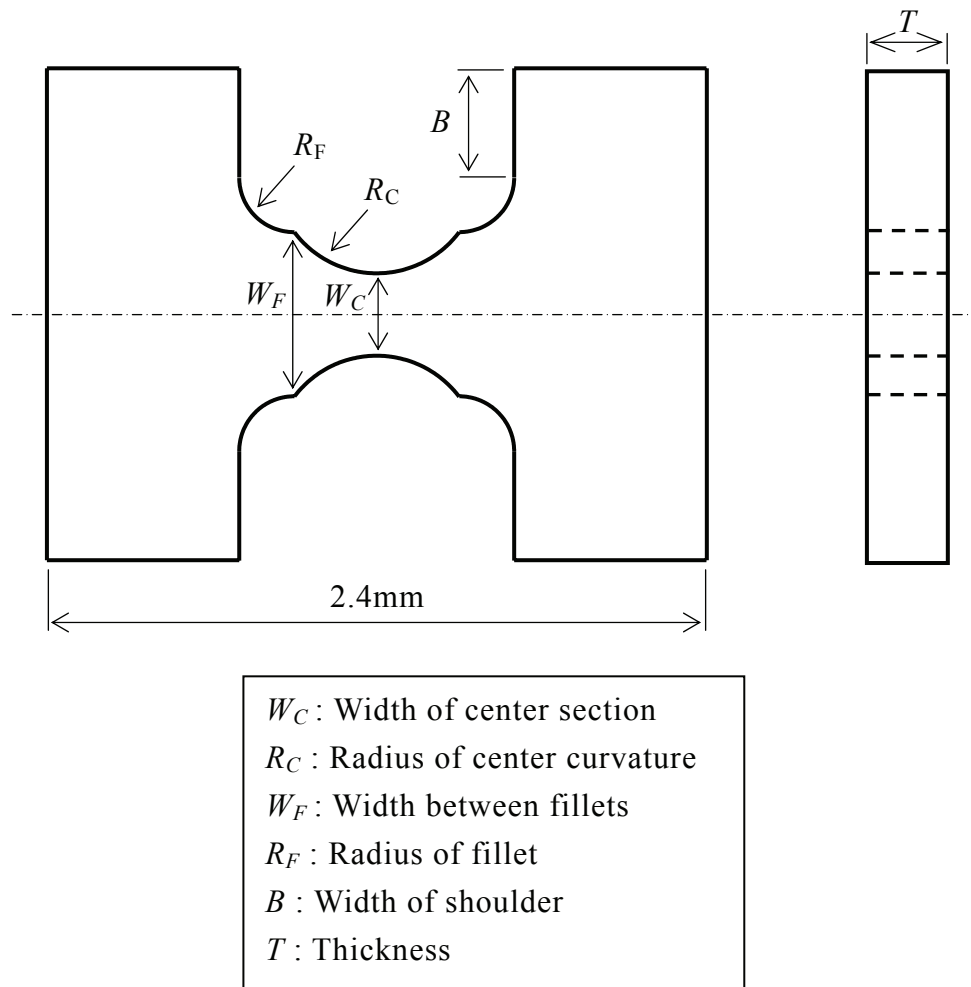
Schematic illustration of shape and dimension of small fatigue specimen.
